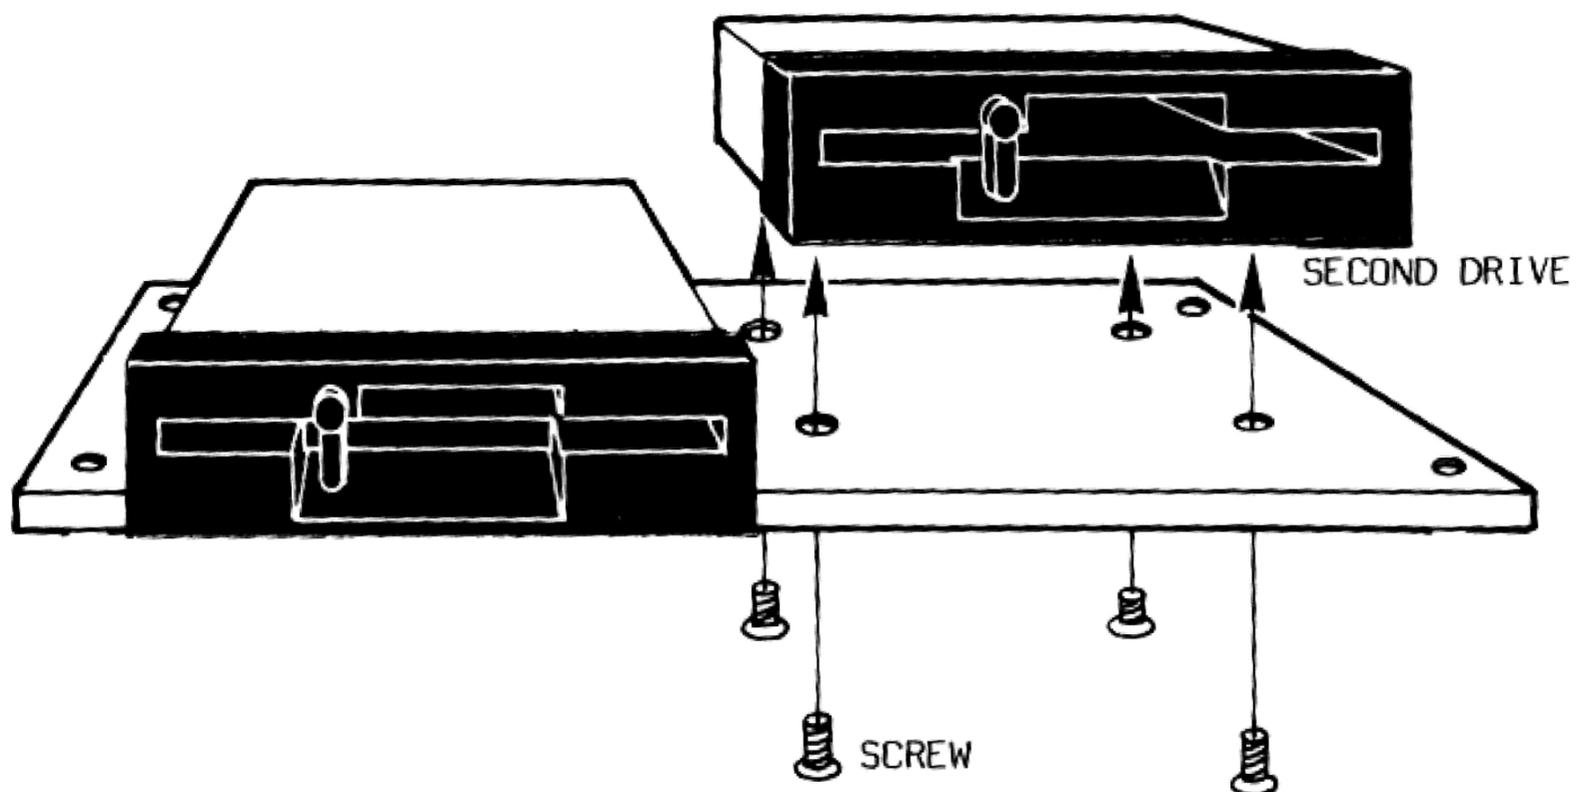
Screwing the Second Drive onto the Mounting Plate
